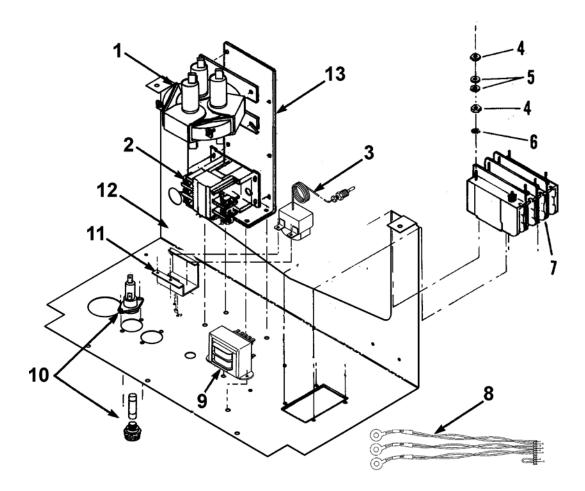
Computron 8000 - 500 – 1 phase Exploded View
